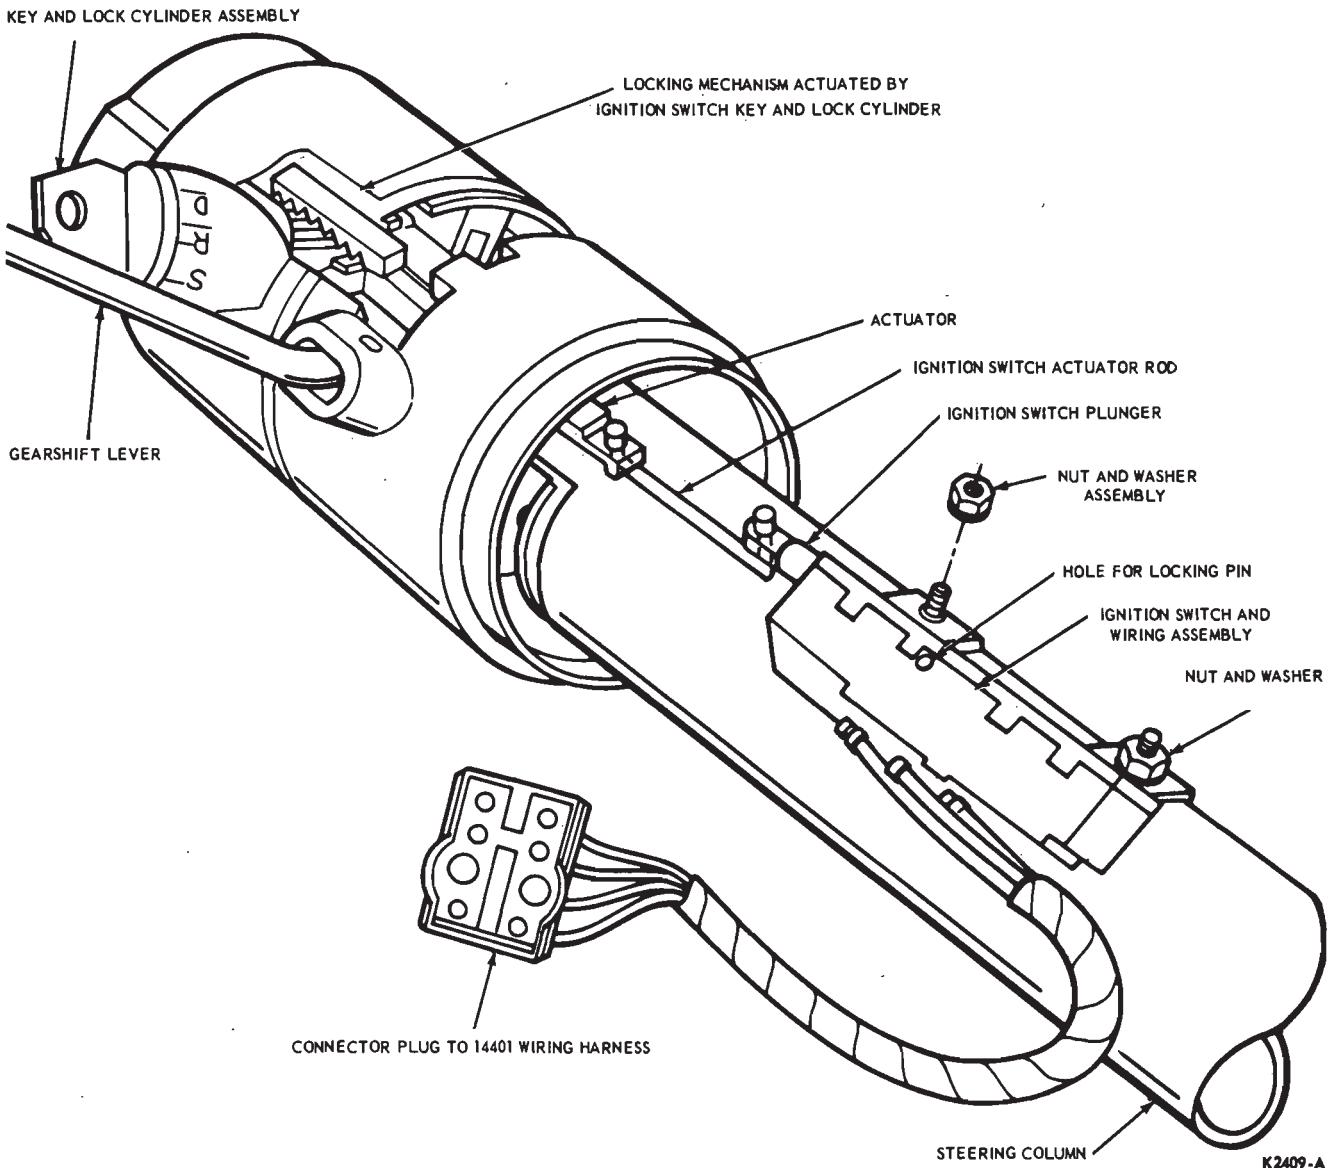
Typical Ignition Switch Installation—Column-Mounted Gear Shift Lever Shown
